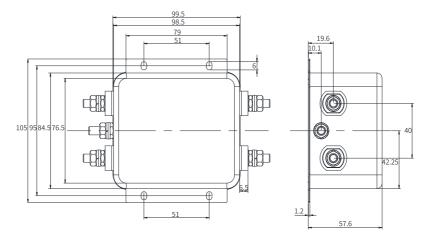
Filter dimensions (FN2010N-60-24) (unit: mm)
